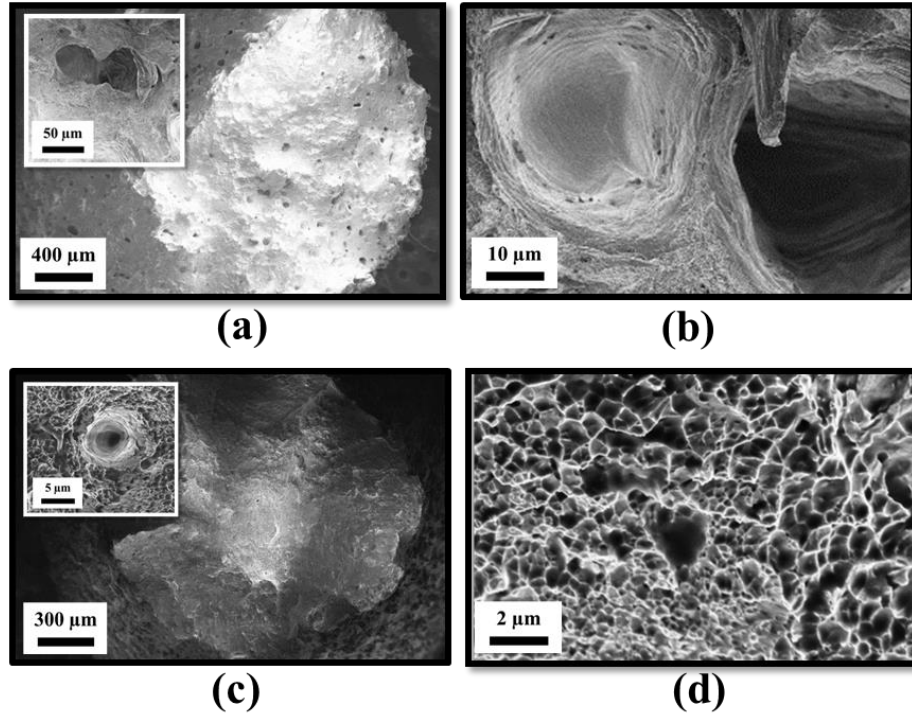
Fracture surface of the tensile samples manufactured with (a), (b) 550 showing the keyhole porosities and void coalescence; and (c), (d) 850mm/s showing a gas porosity surrounded by dimple (c) and dimple-like fracture surface morphology of ductile fracture (d).
